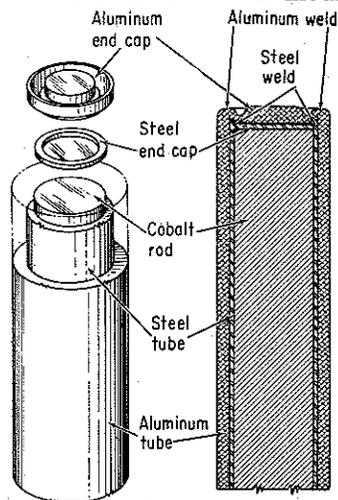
Exploded and cross-section view of an encapsulated cobalt rod
